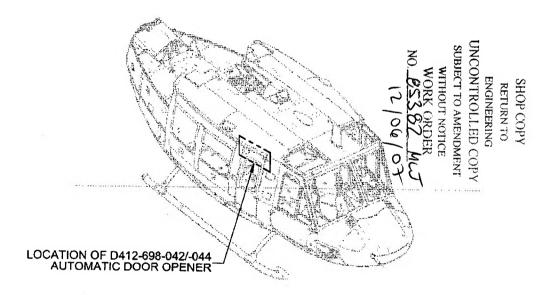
LOCATION OF HINGE PANEL AUTOMATIC DOOR OPENER KITS (RH Installation Shown, LH Opposite)
